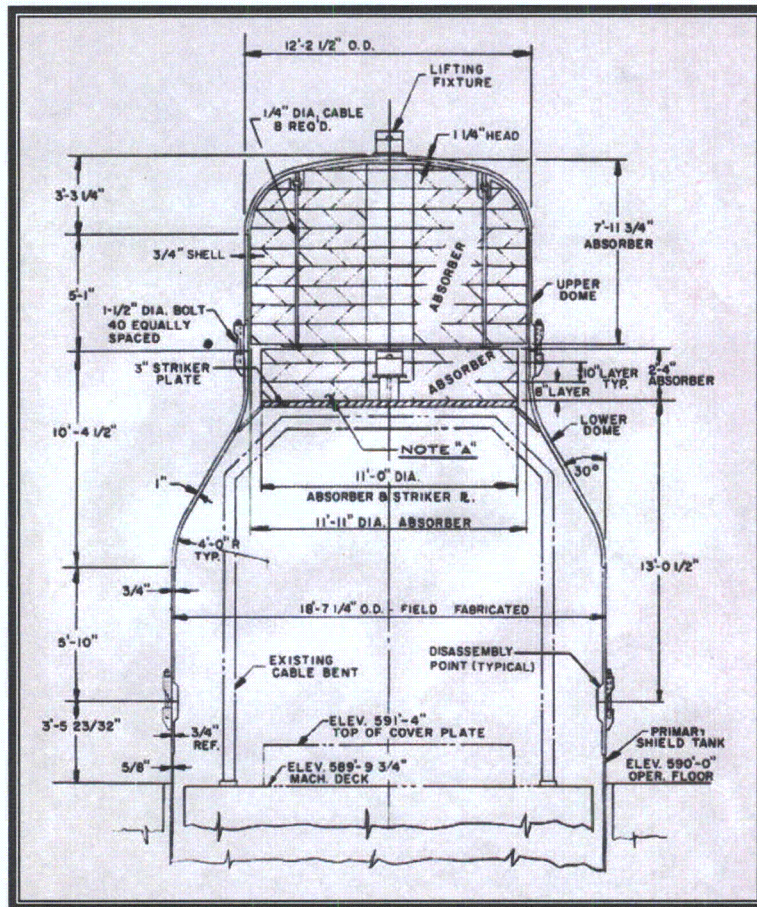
Section of machinery dome and absorber (Courtesy DECo)
